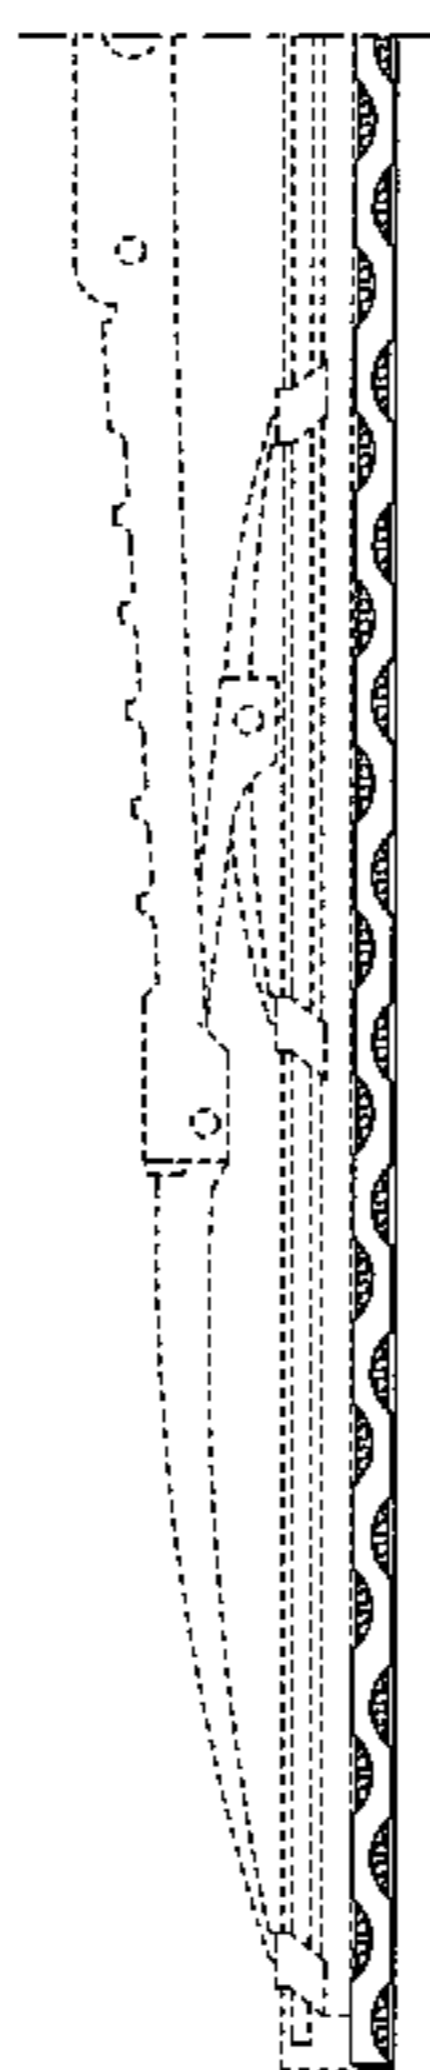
is a rear view of the windshield scrubber. The broken lines depict wiper blade body, and cleaning pad sheath as environmental structure not claimed.
